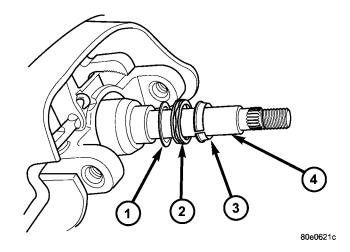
SHIM, WAVE WASHER, AND LOWER BEARING WEDGE INSTALLATION
